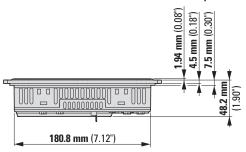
Dimensions for 7.0" rear (panel) mounting devices in mm (inches)XV-313-..-...-A00-...
